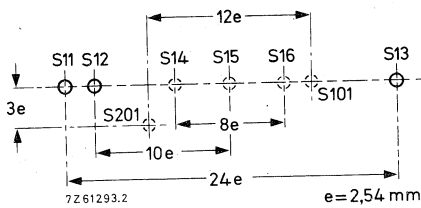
Hole pattern in the printed-wiring board for a single potentiometer (viewed on component side).
